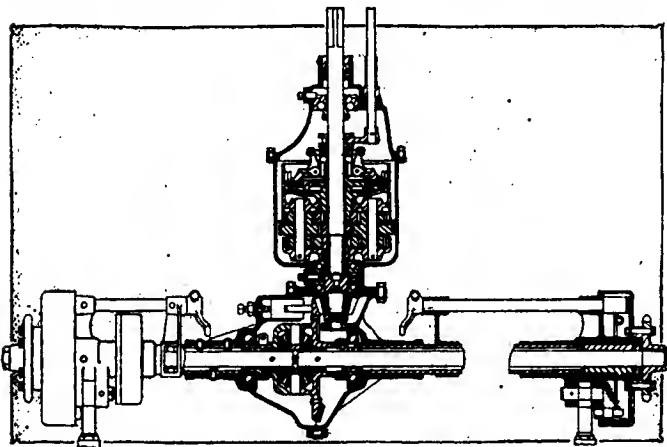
The Muncie Gear Works' unit gearset and jackshaft for trucks of from 1,000 to 1,500 pounds. The axle shafts are carried on roller bearings
